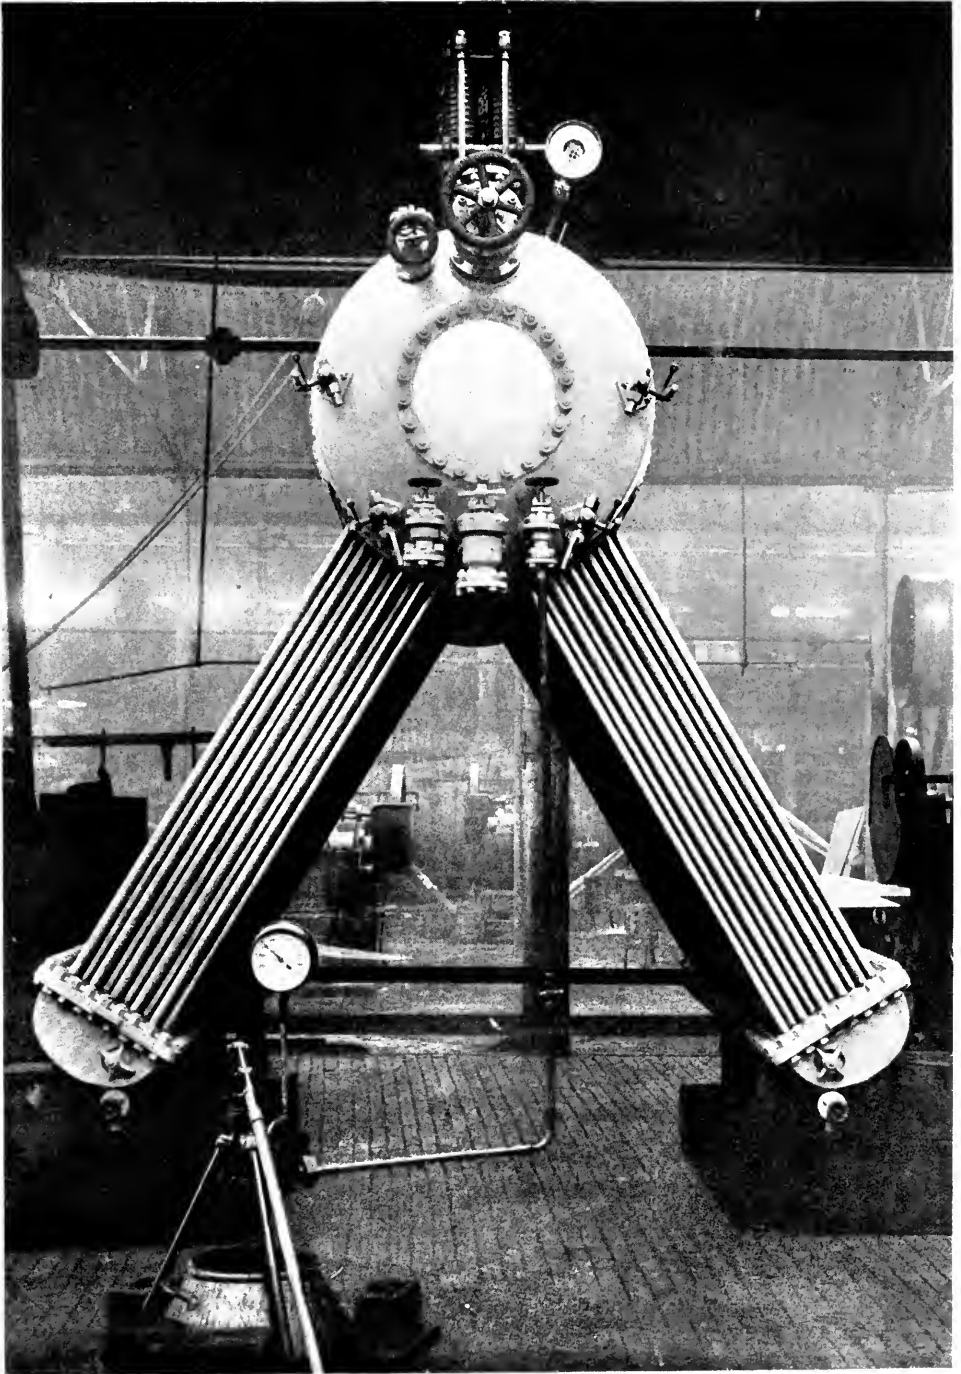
PLATE II. —STRAIGHT TUBE MARINE BOILER.
